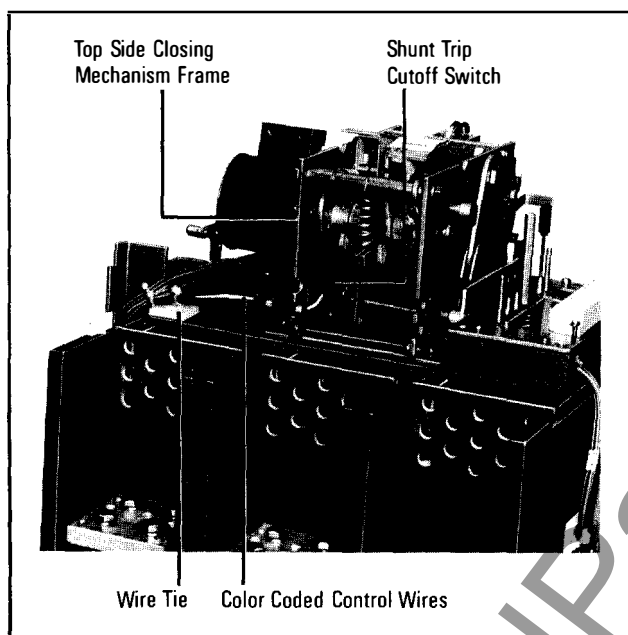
Shunt Trip Cutoff Switch Installed
